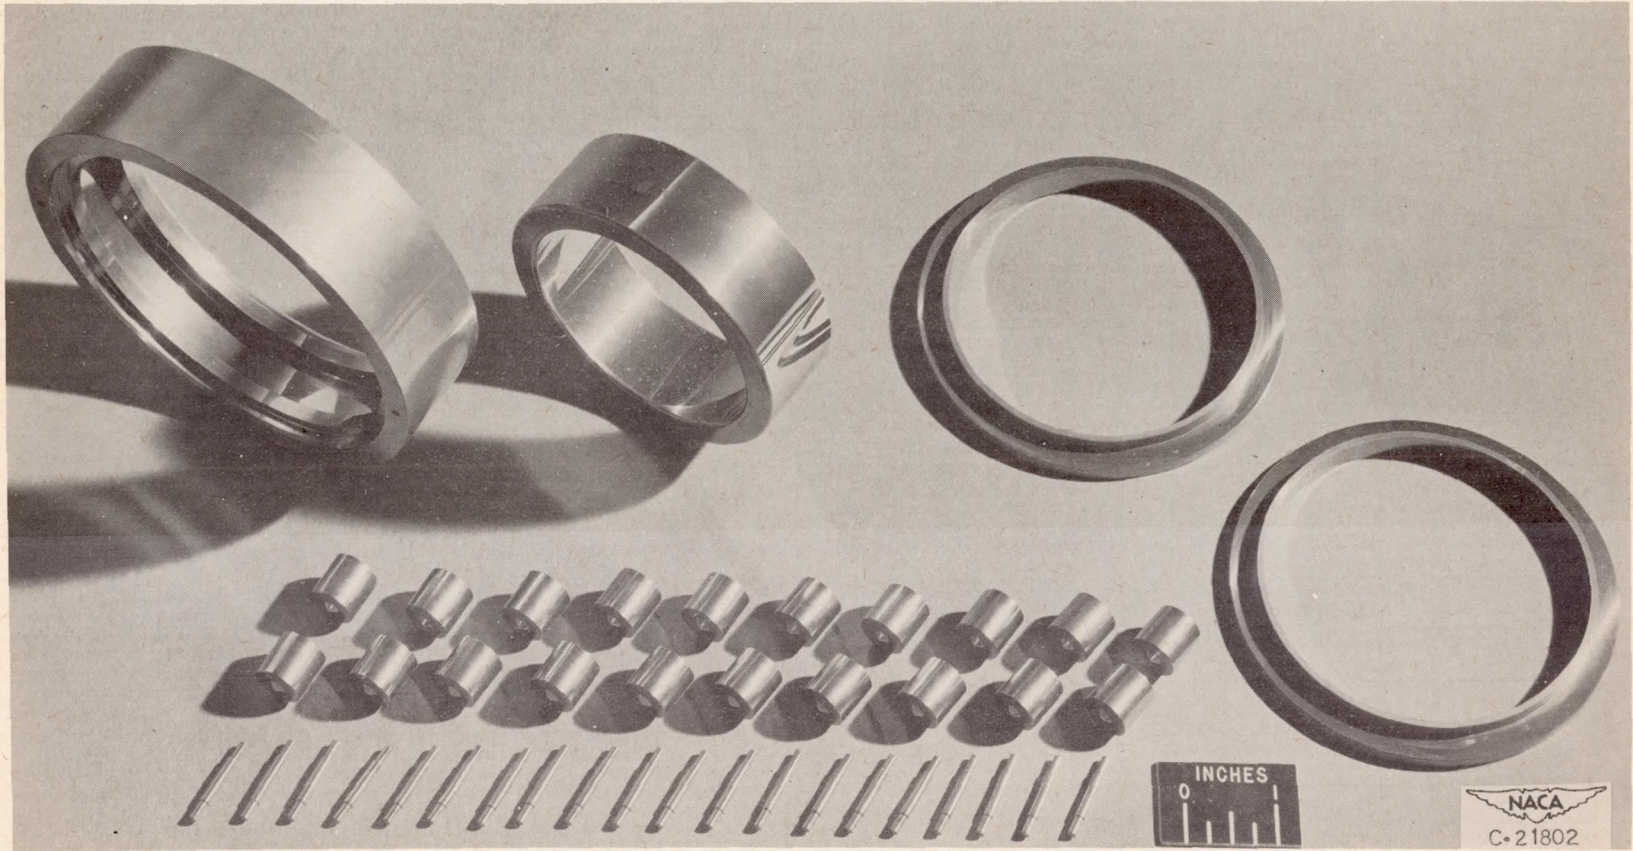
Special tungsten carbide cageless roller bearing (bearing 4a).
